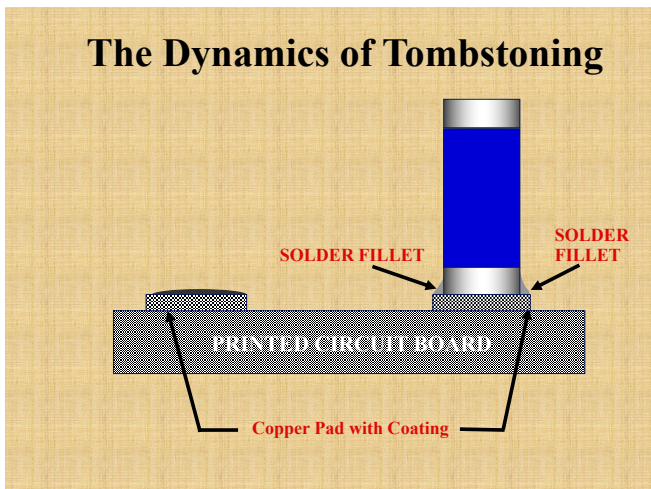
Solder Wetting on Surface Mounted Devices. Significant, Unbalanced Moment Causing Tombstoning
